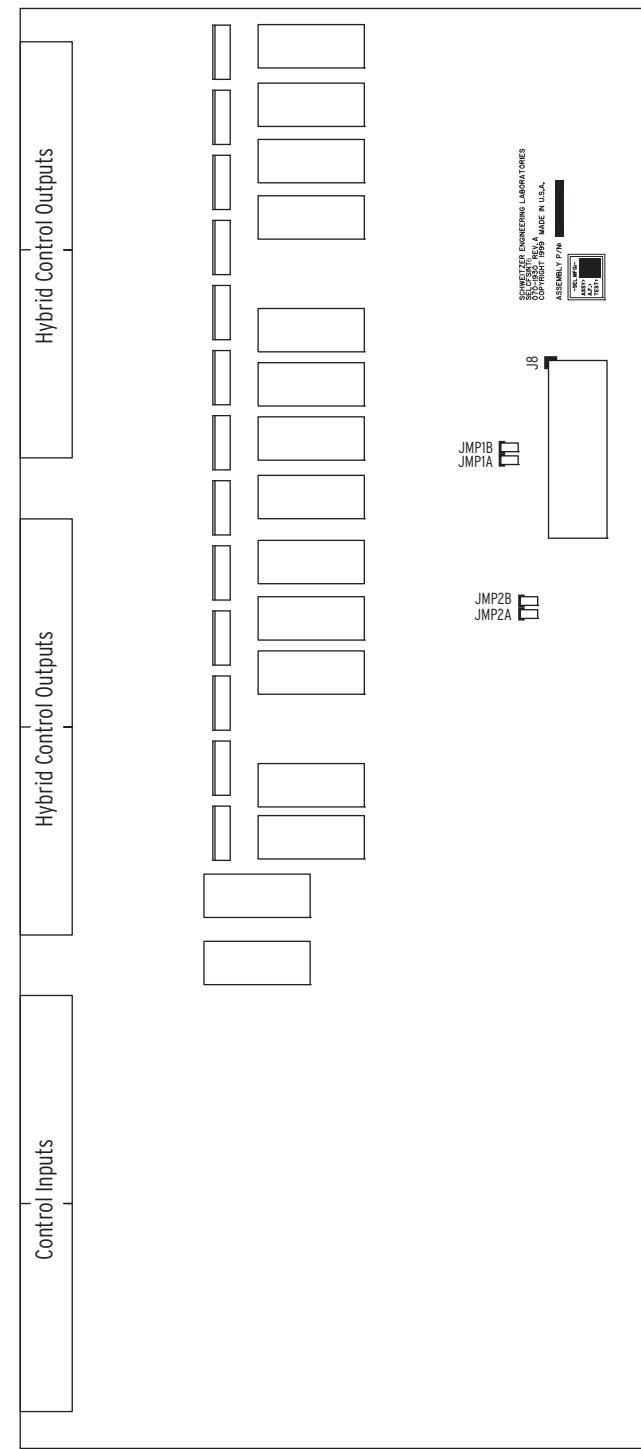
Major Component Locations on the SEL-421 INT4 I/O Board
